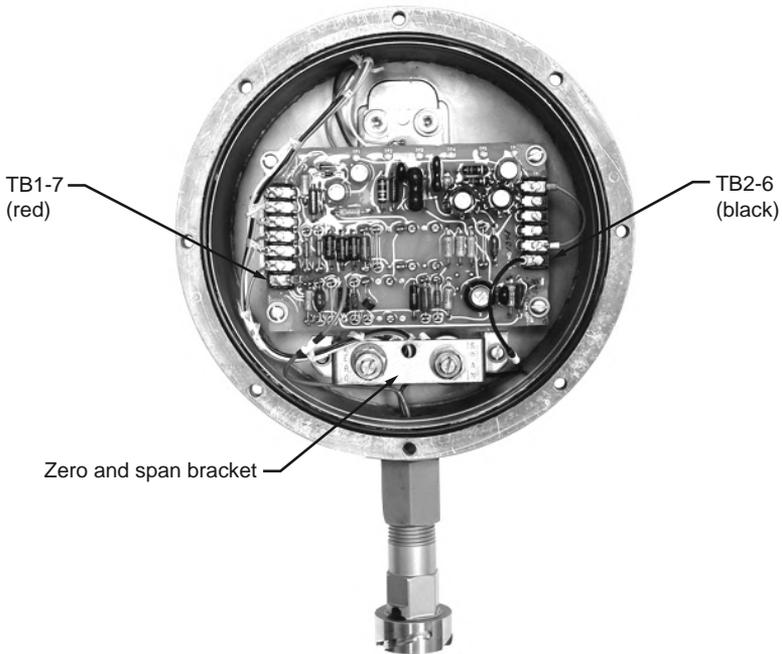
Wiring for EGS quick disconnect connector assembly
